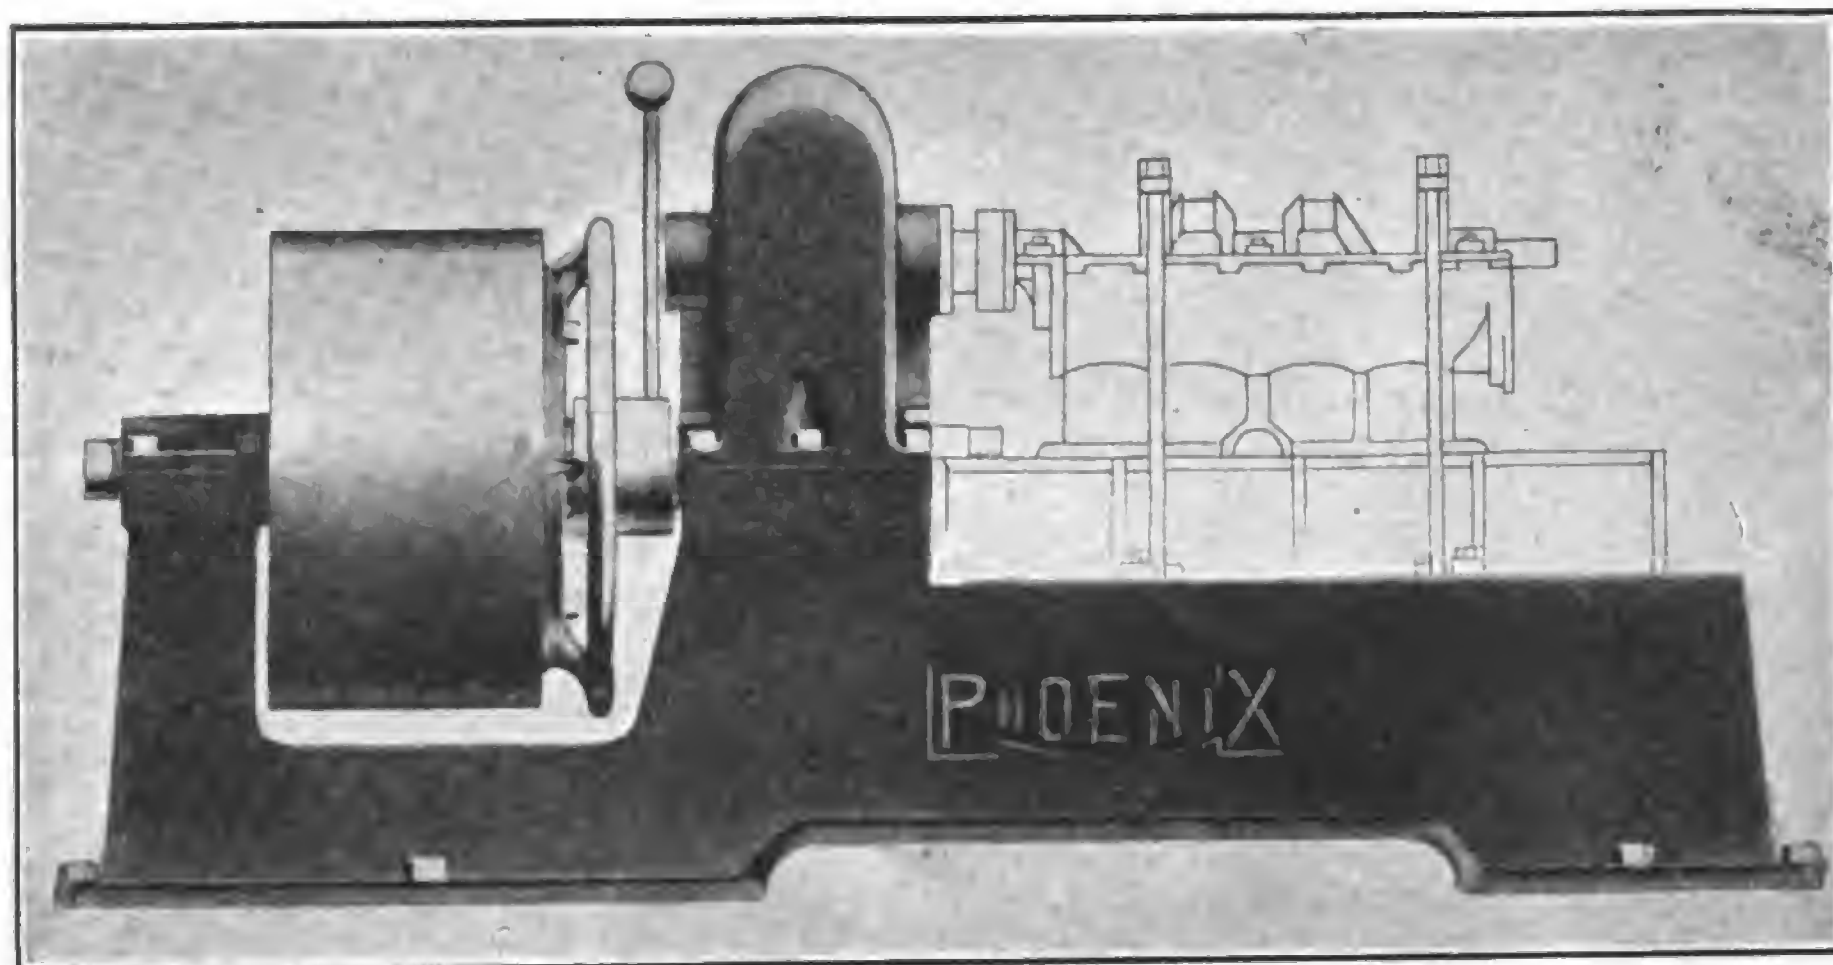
One of the Best Types of Modern Burning-In Machines.
